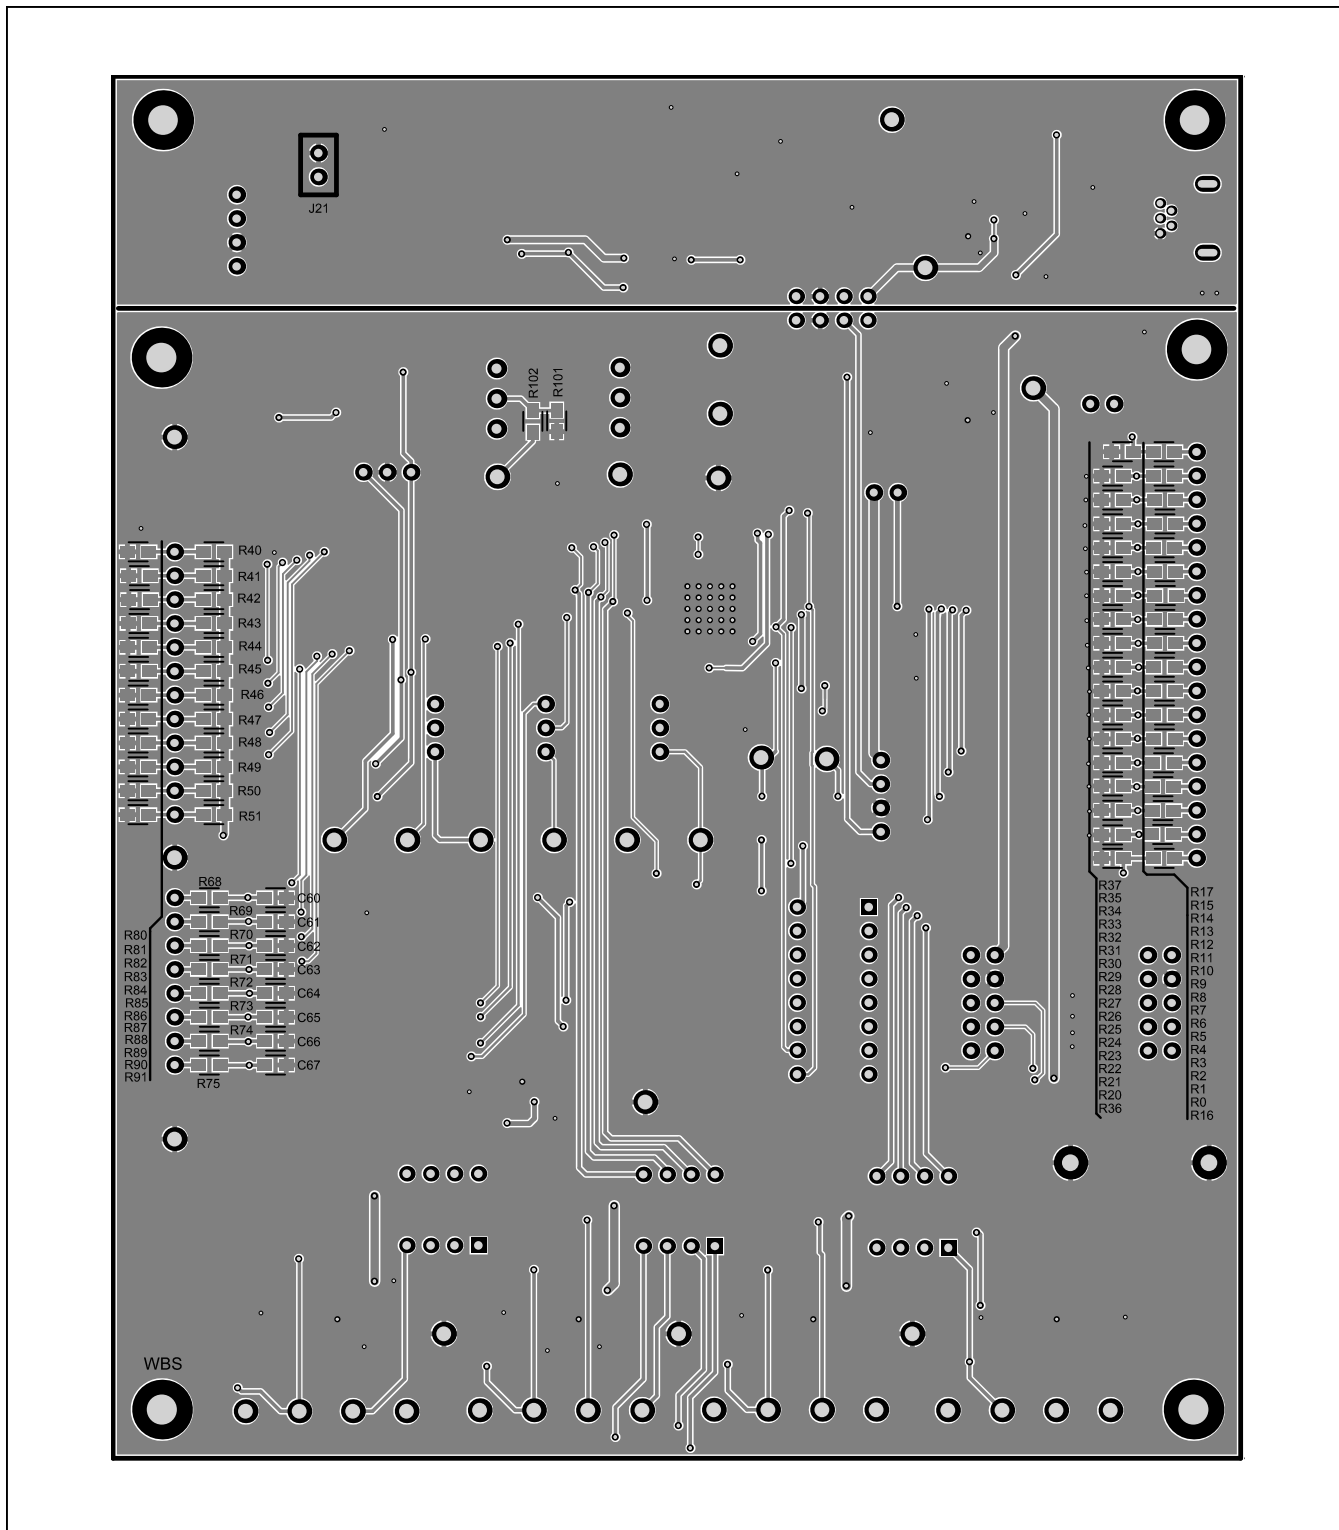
MAX34451 EV Kit PCB Layout—Bottom Layer
